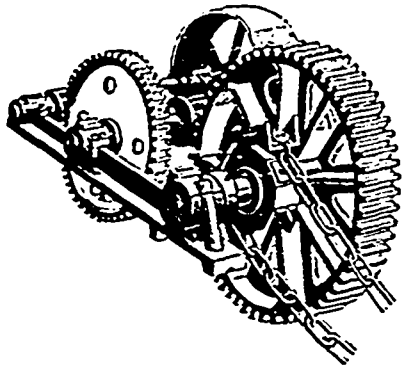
LOG JACK AND CONVEYOR CHAIN.
